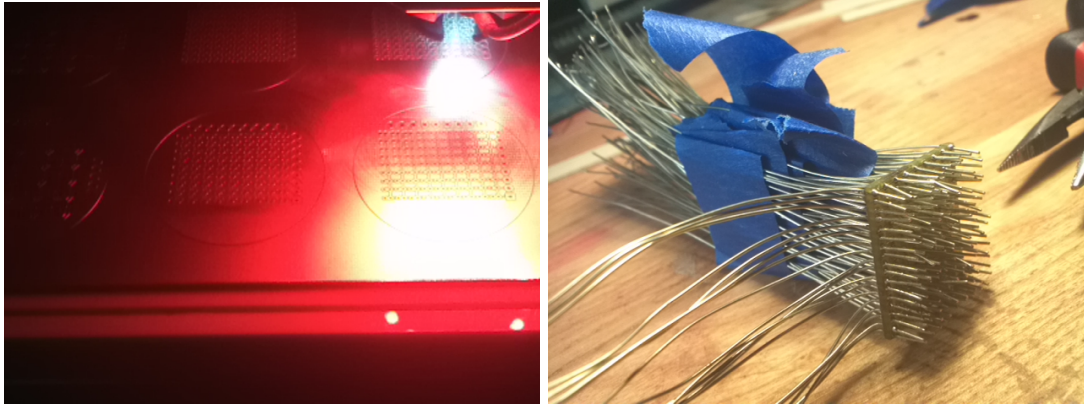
Process PCB Milling and Electrode Soldering Layout
